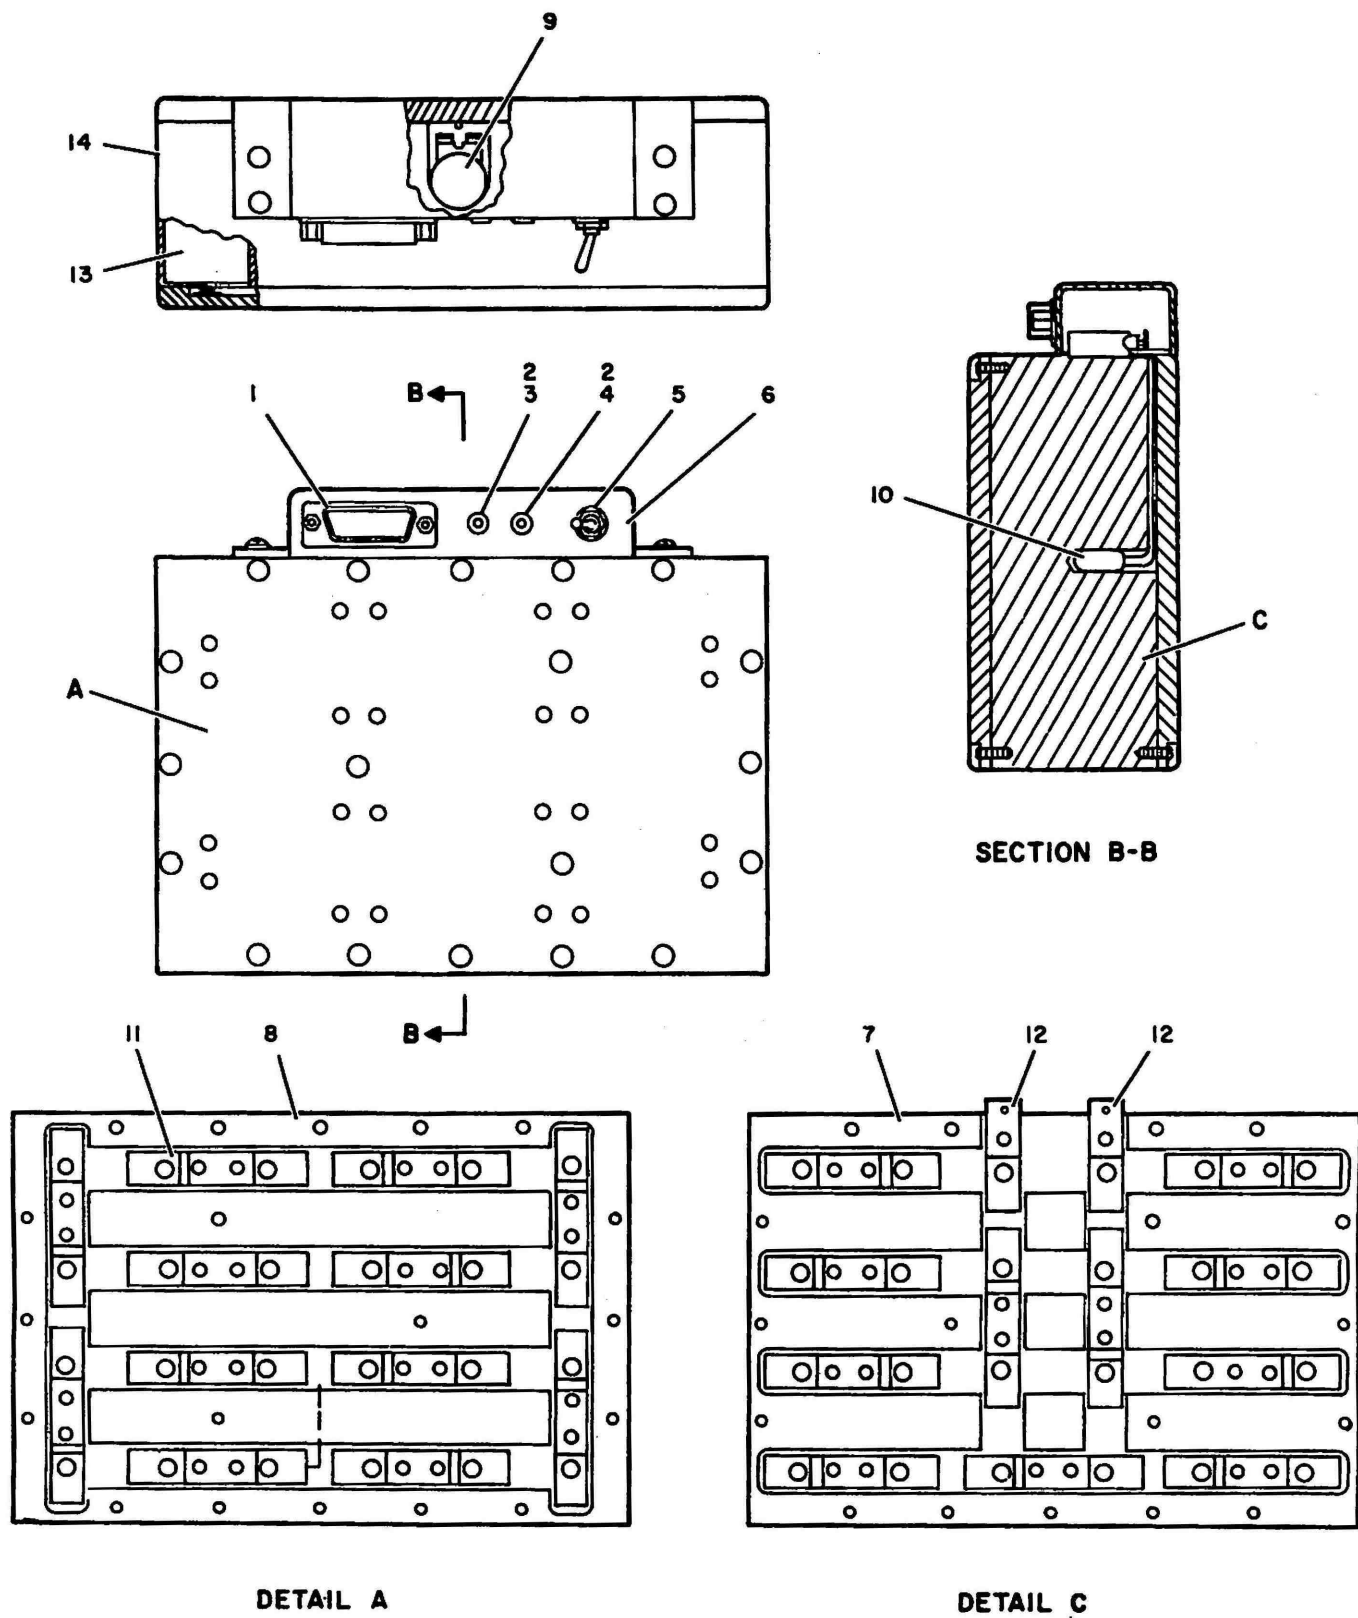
Logic Board Assembly (Sheet 1 of 2)
